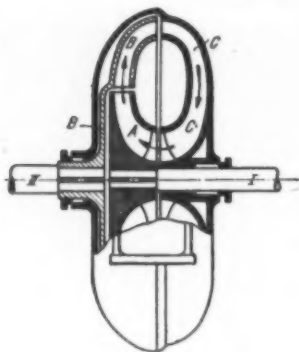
TYPE OF TURBO-TRANSFORMER.
